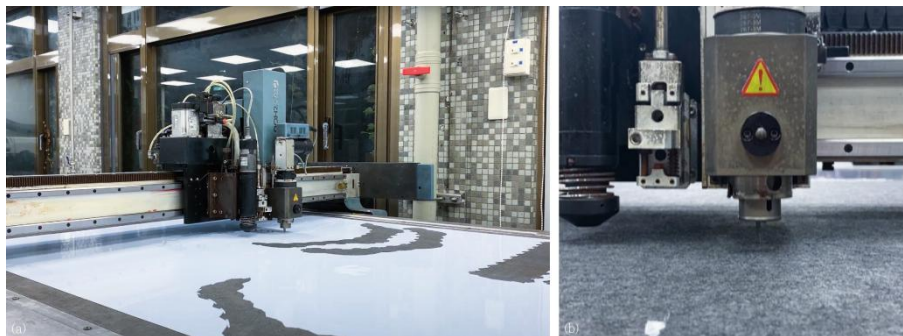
(a) Oscillating knife-cutting machine. (b) Closeup
